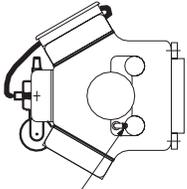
Dimensions, Unit Sizes 090, 245B
